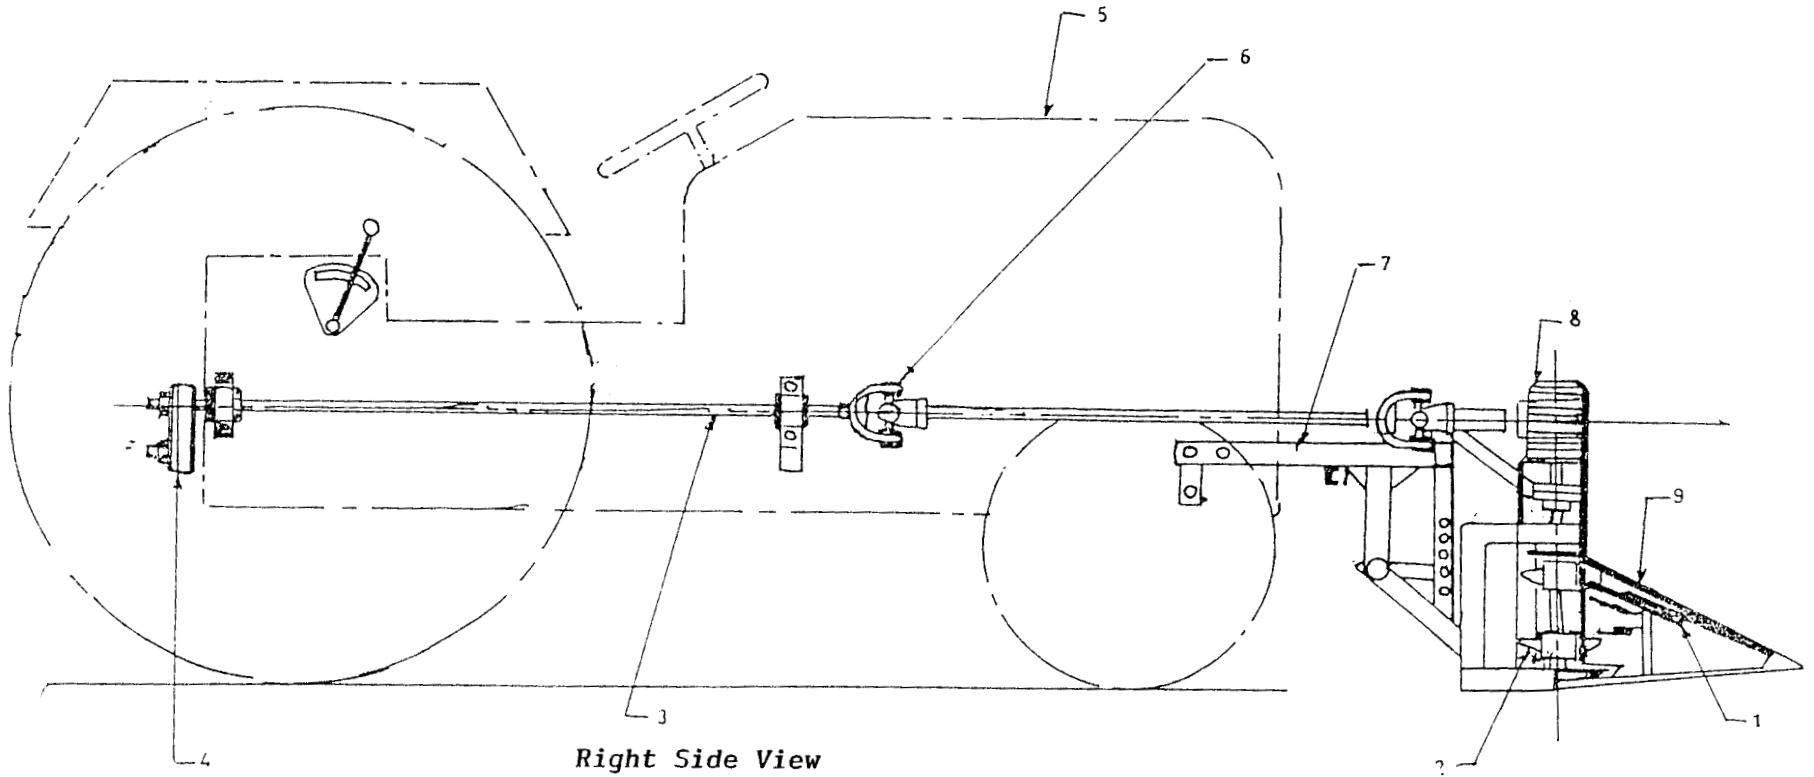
TRACTOR OPERATED VERTICAL CONVEYER REAPER
